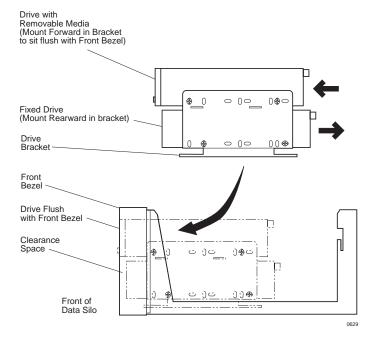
Adjusting the Drive Clearance (DS50 2-Bay)
